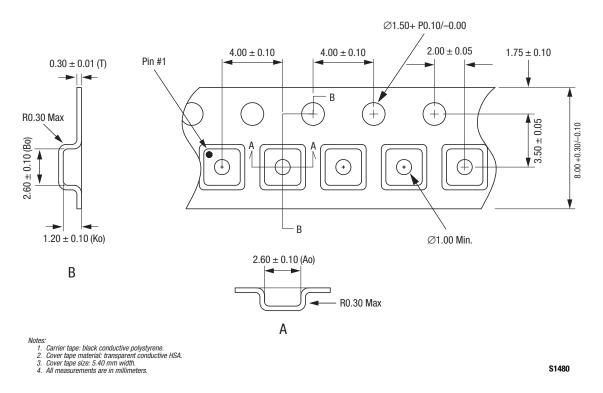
SKY13347-360LF Tape and Reel Dimensions
